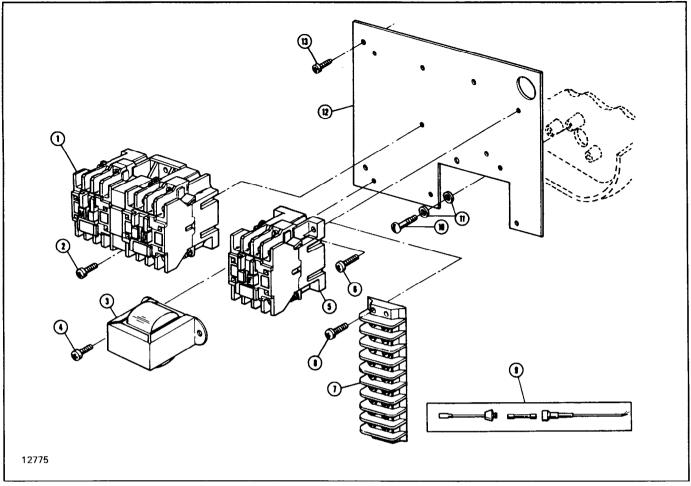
Electrical Control Equipment. Three Phase Hoists.
